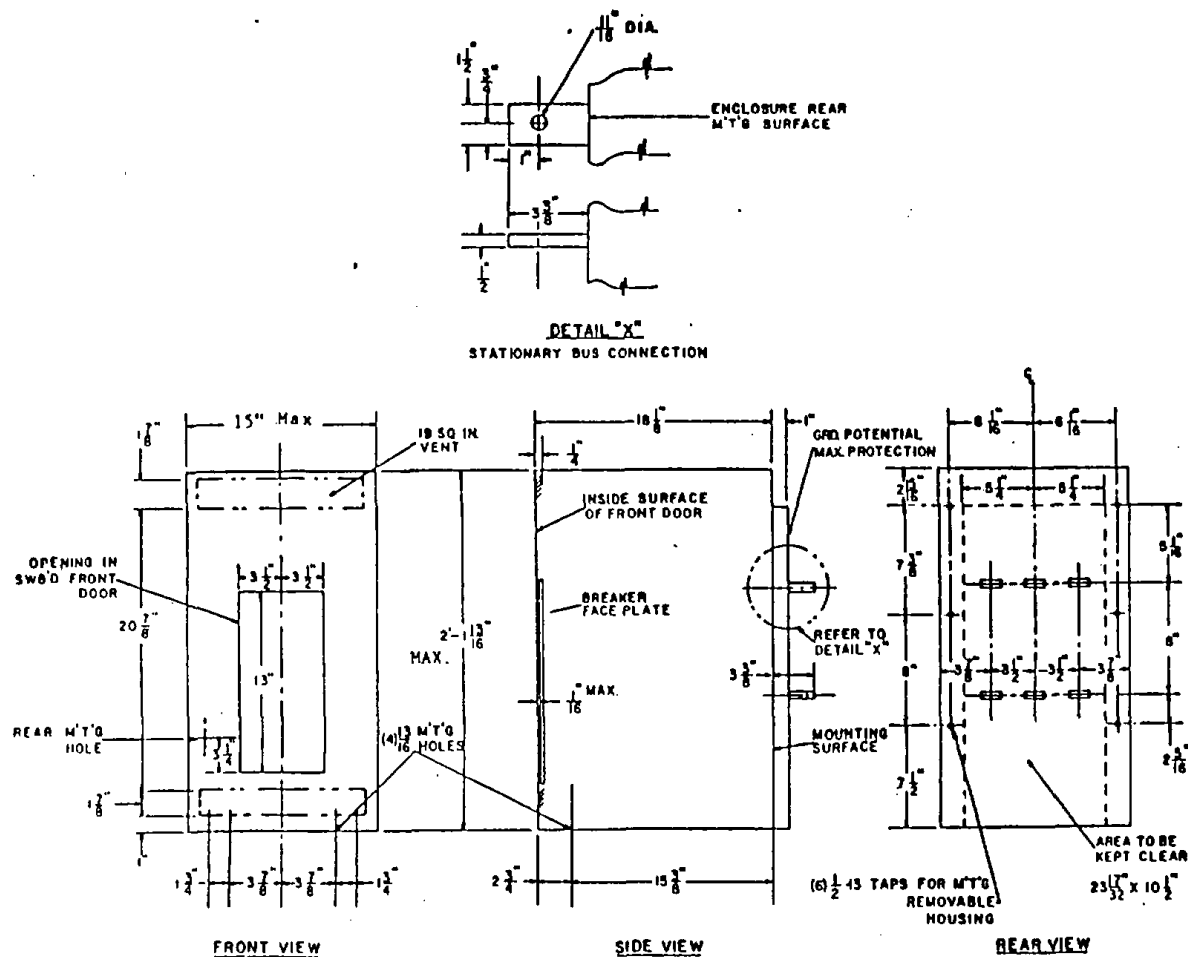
Outline and mounting dimensions for circuit breaker type ACB-900R.
